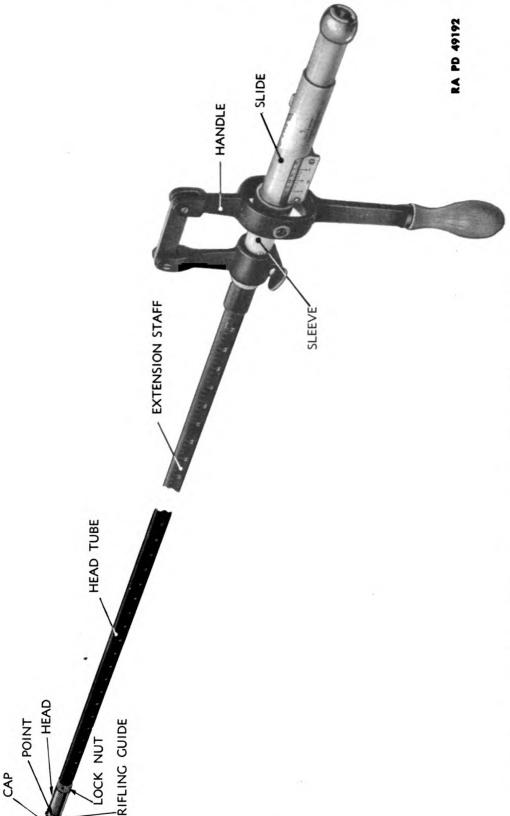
Exterior View of 0.75-inch Star Gage with 3-point Head Assembled for Star-gaging
